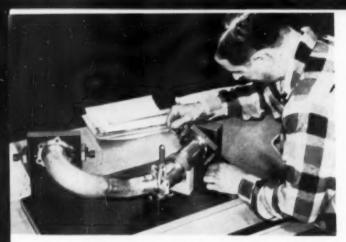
In inspection of workpiece, inspector checks tolerances at three points or more. Bending machine holds accuracy to $\pm \frac{1}{2}$ deg.
